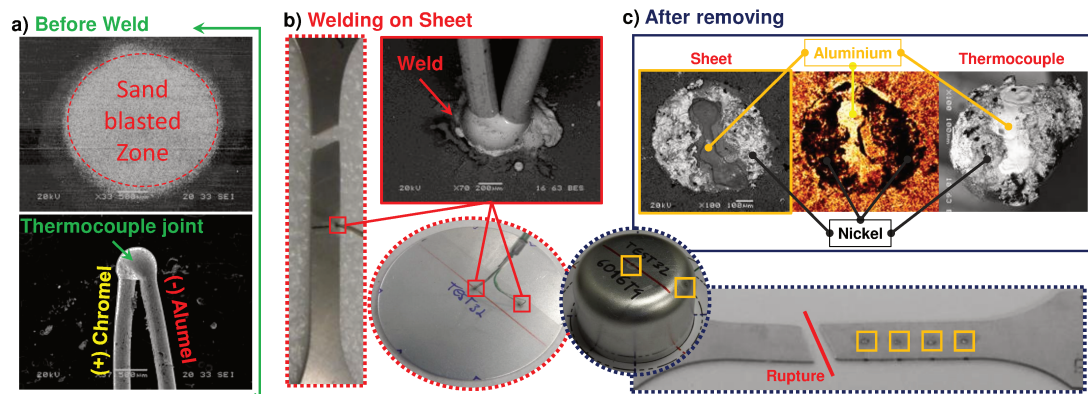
Thermocouple welding steps in the sheet: a) sand blasted local region in sheet and thermocouple joint; b) welding positions on the sheet and detail of the welded thermocouple; c) welding positions on the sheet after the thermocouple removal and details highlighting the transfer of materials.
